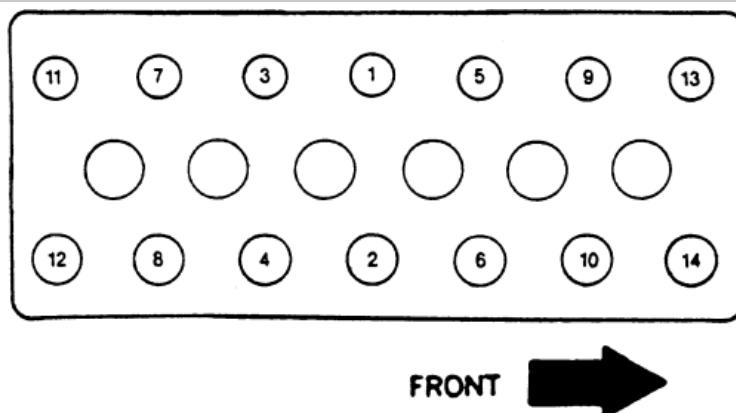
2.9L 6-cylinder engine cylinder head bolt tightening sequence
